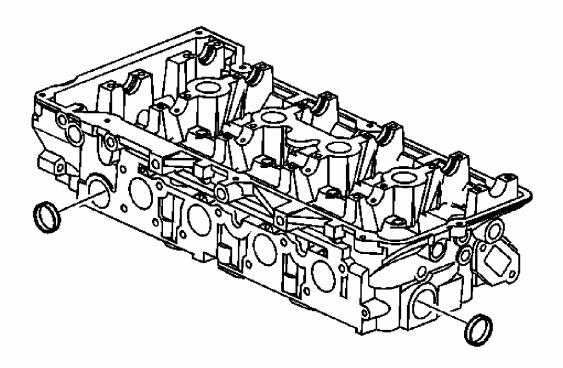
Locating Left Cylinder Head Expansion Coolant Plugs Courtesy of GENERAL MOTORS CORP.
